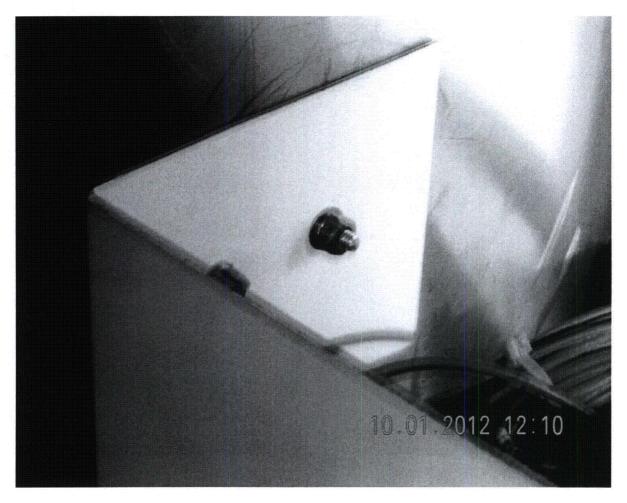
, Close-Up of Bolts Supporting Panel's Front Mounting Plate
